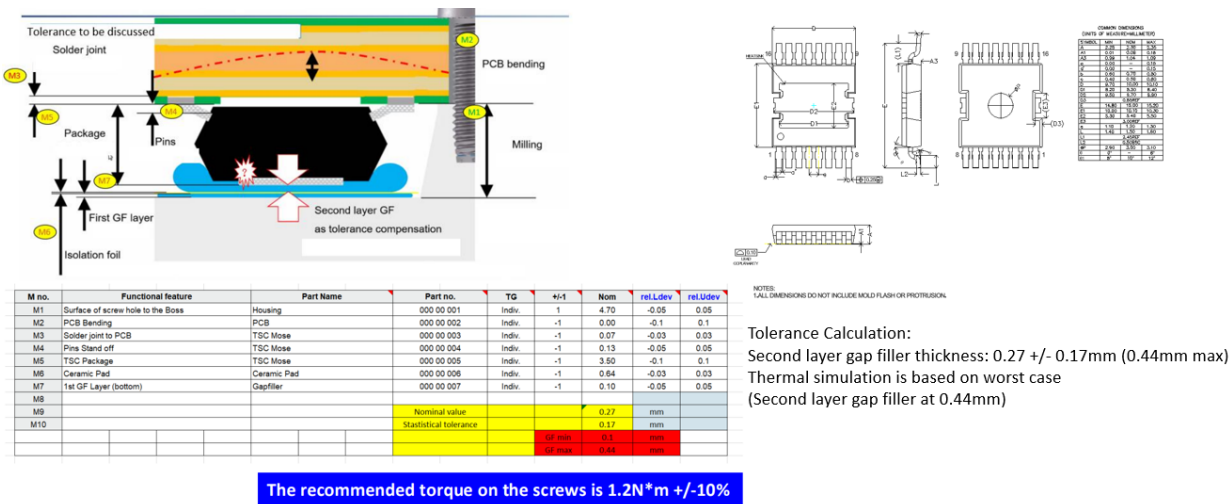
Heatsink Mounting Tolerance Calculation
